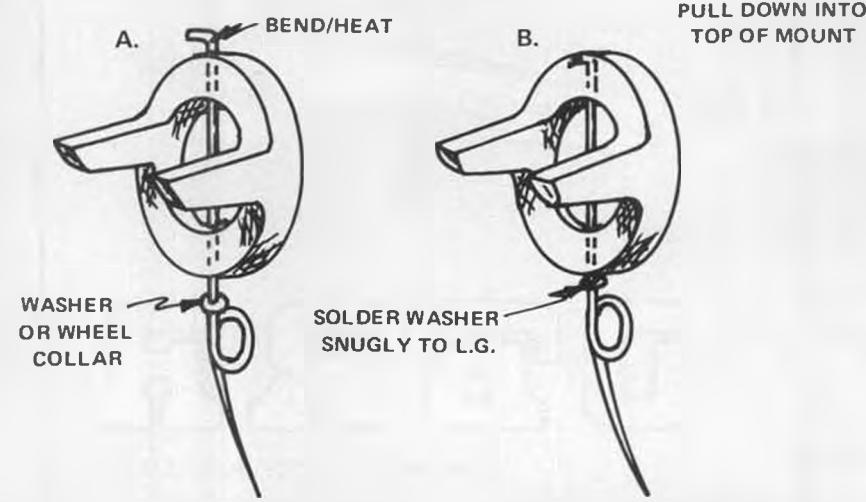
Fig. A: Drill hole through mount back plate. Place washer or wheel collar on L.G. Insert in hole, bend a 90 degree angle in top of L.G., heat, and pull down into top of mount. Fig. B: Solder washer or tighten wheel collar snugly against bottom of mount.
